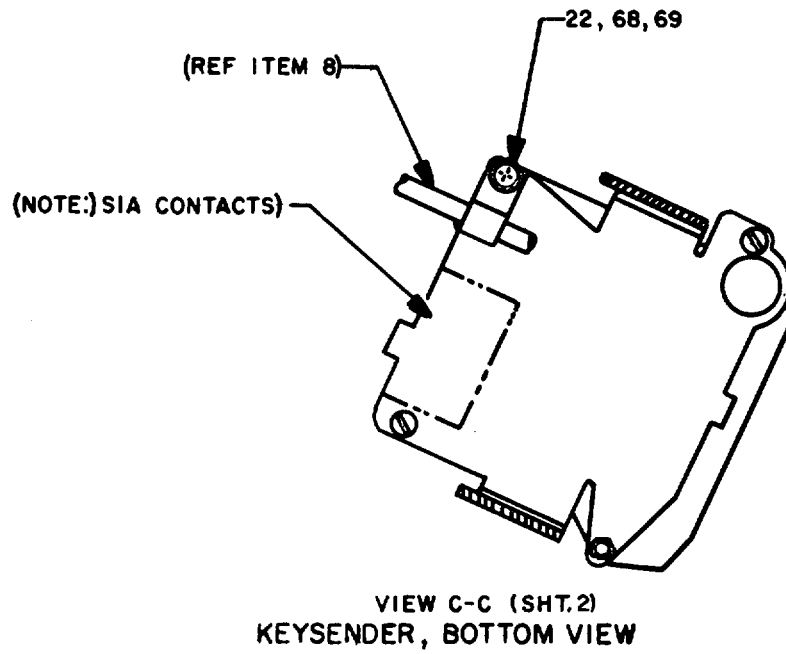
Base Plate Assembly (Sheet 2 of 4)
